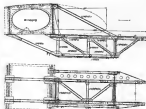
SIDE ELEVATION AND PLAN OF AN ENGINE MOUNTING. THE RIVETED ENDS OF THE WINGS ARE SHOWN AT A DOUBLE LINE.
